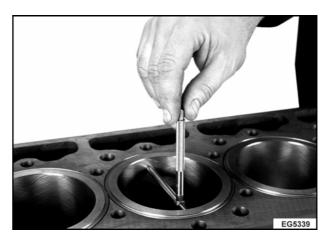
Checking cylinder sleeve inside diameter with telescoping gauge
